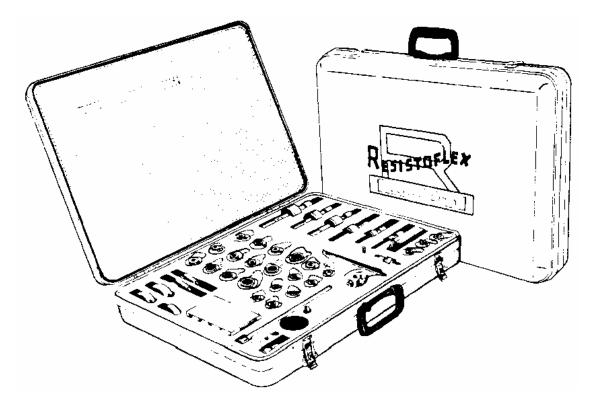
Typical Field Installation and Repair Tool Kit (Sheet 1 of 4)
